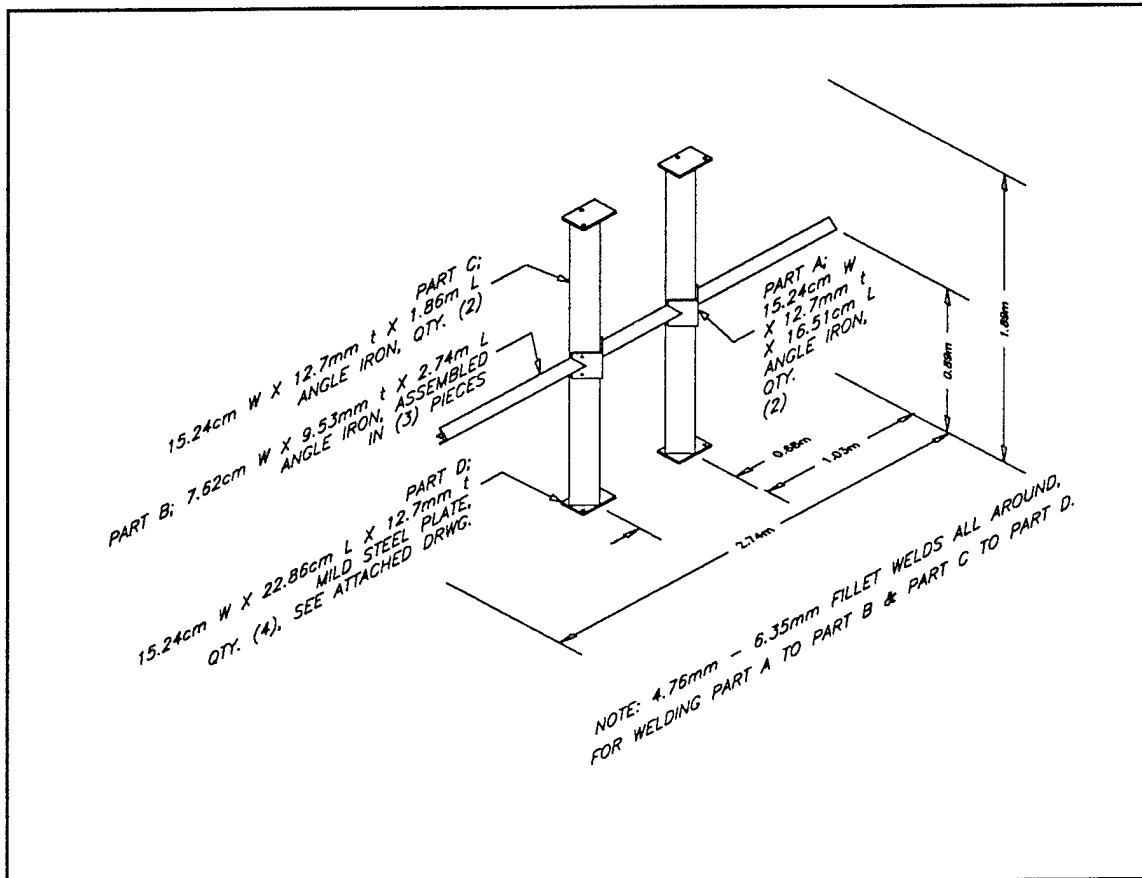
Spreader Vane Assembly for 1.68-m Shock Tube.
